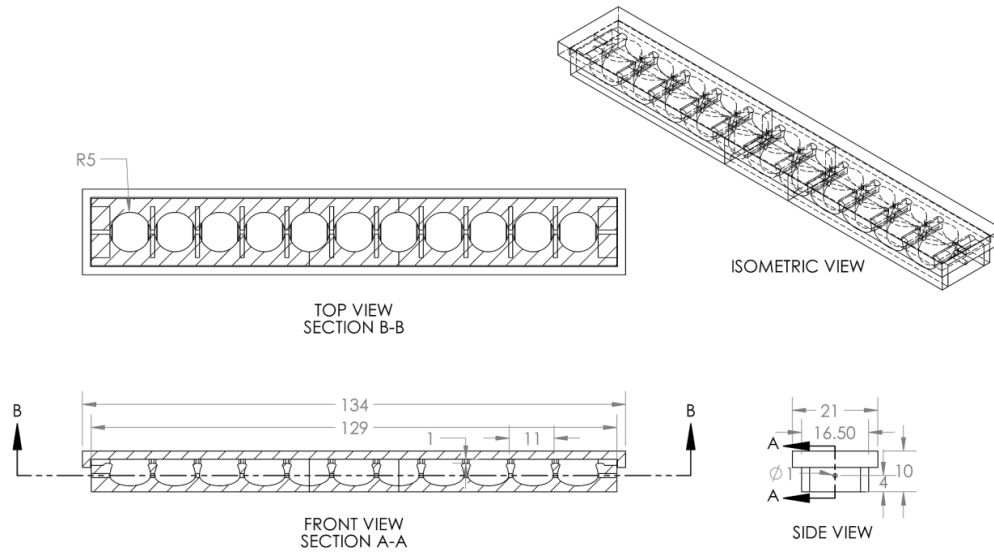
Orthogonal views of mold assembly for finger actuator
